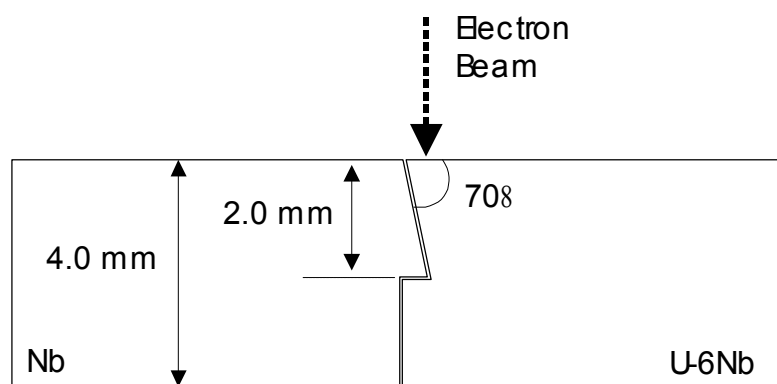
Schematic drawing of the electron beam weld joint design. The beam is offset 0.5 mm into the U-6wt%Nb alloy from joint interface on the top surface of the component and a beveled joint design is employed to minimize mixing of the two alloys.
